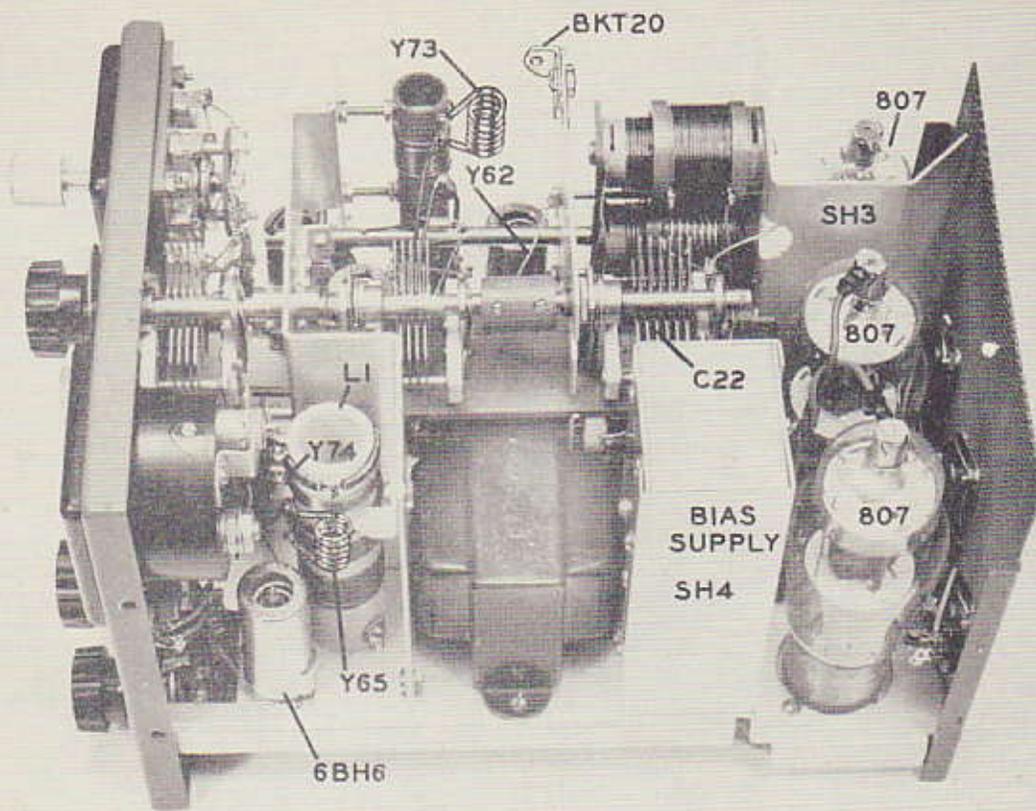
A RIGHT VIEW OF COMPLETED ASSEMBLY
